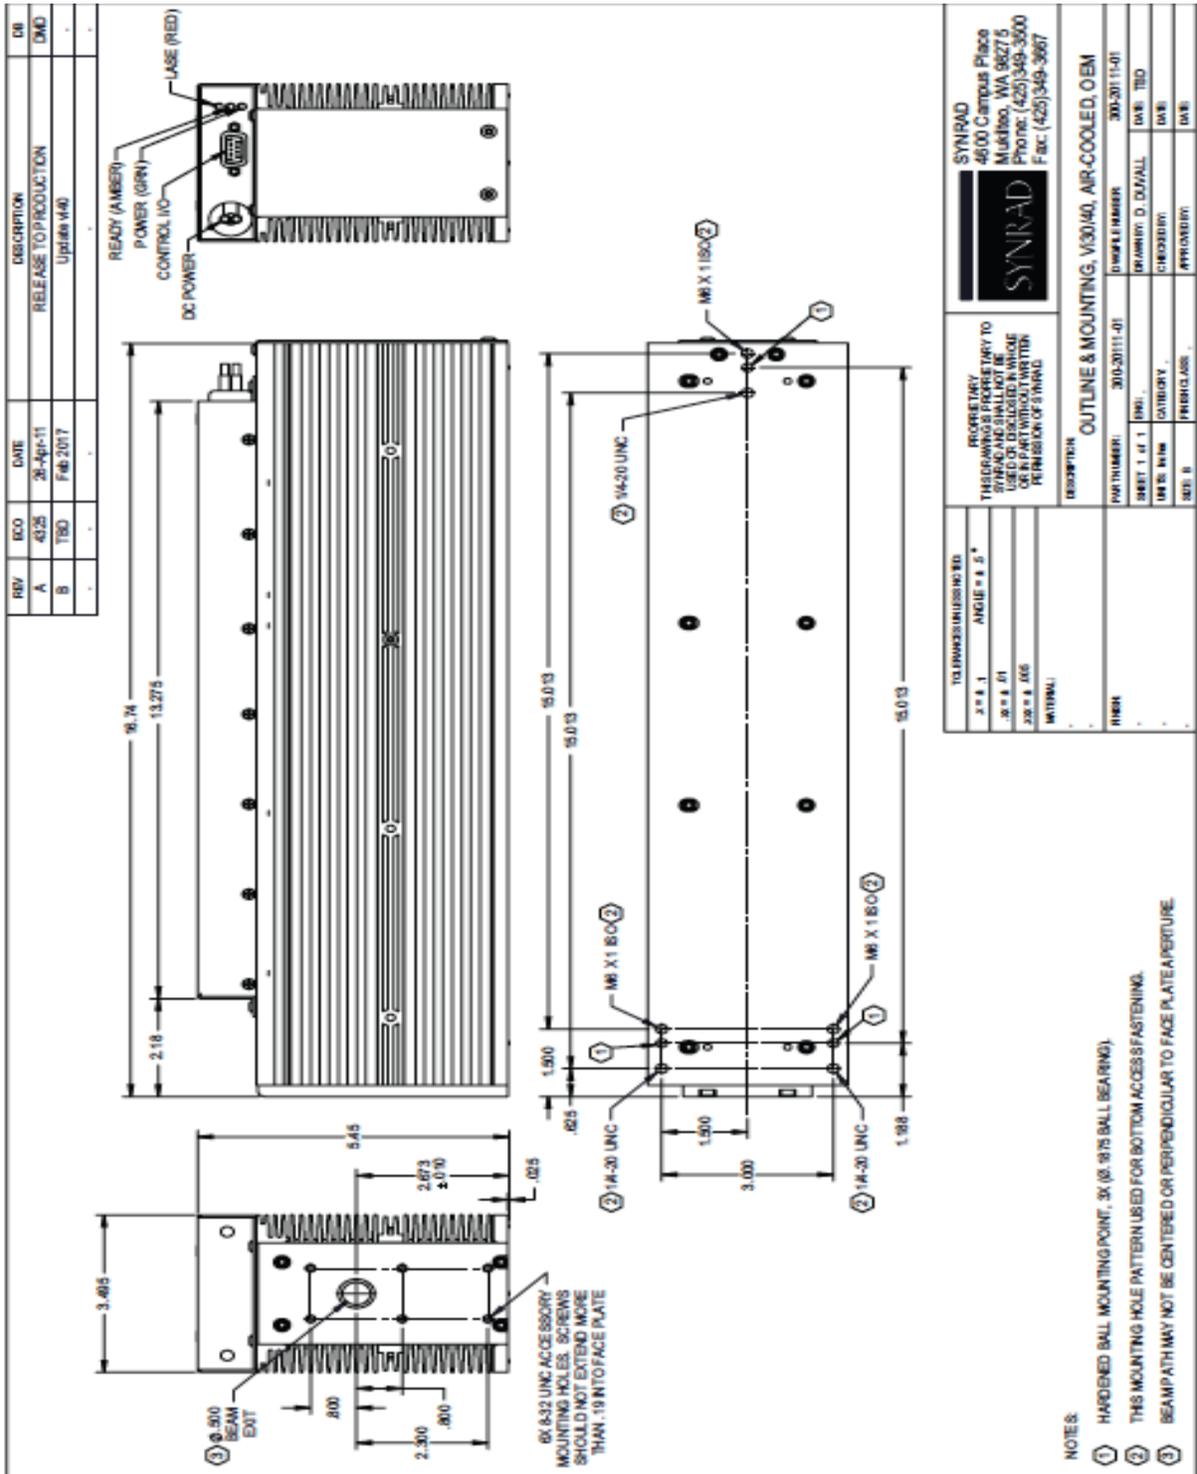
OEM vi40 standard package outline and mounting dimensions.
